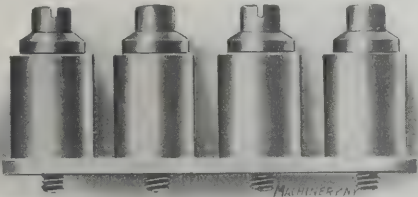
Tool-makers' Buttons with Screw and Washers for Jig Work
